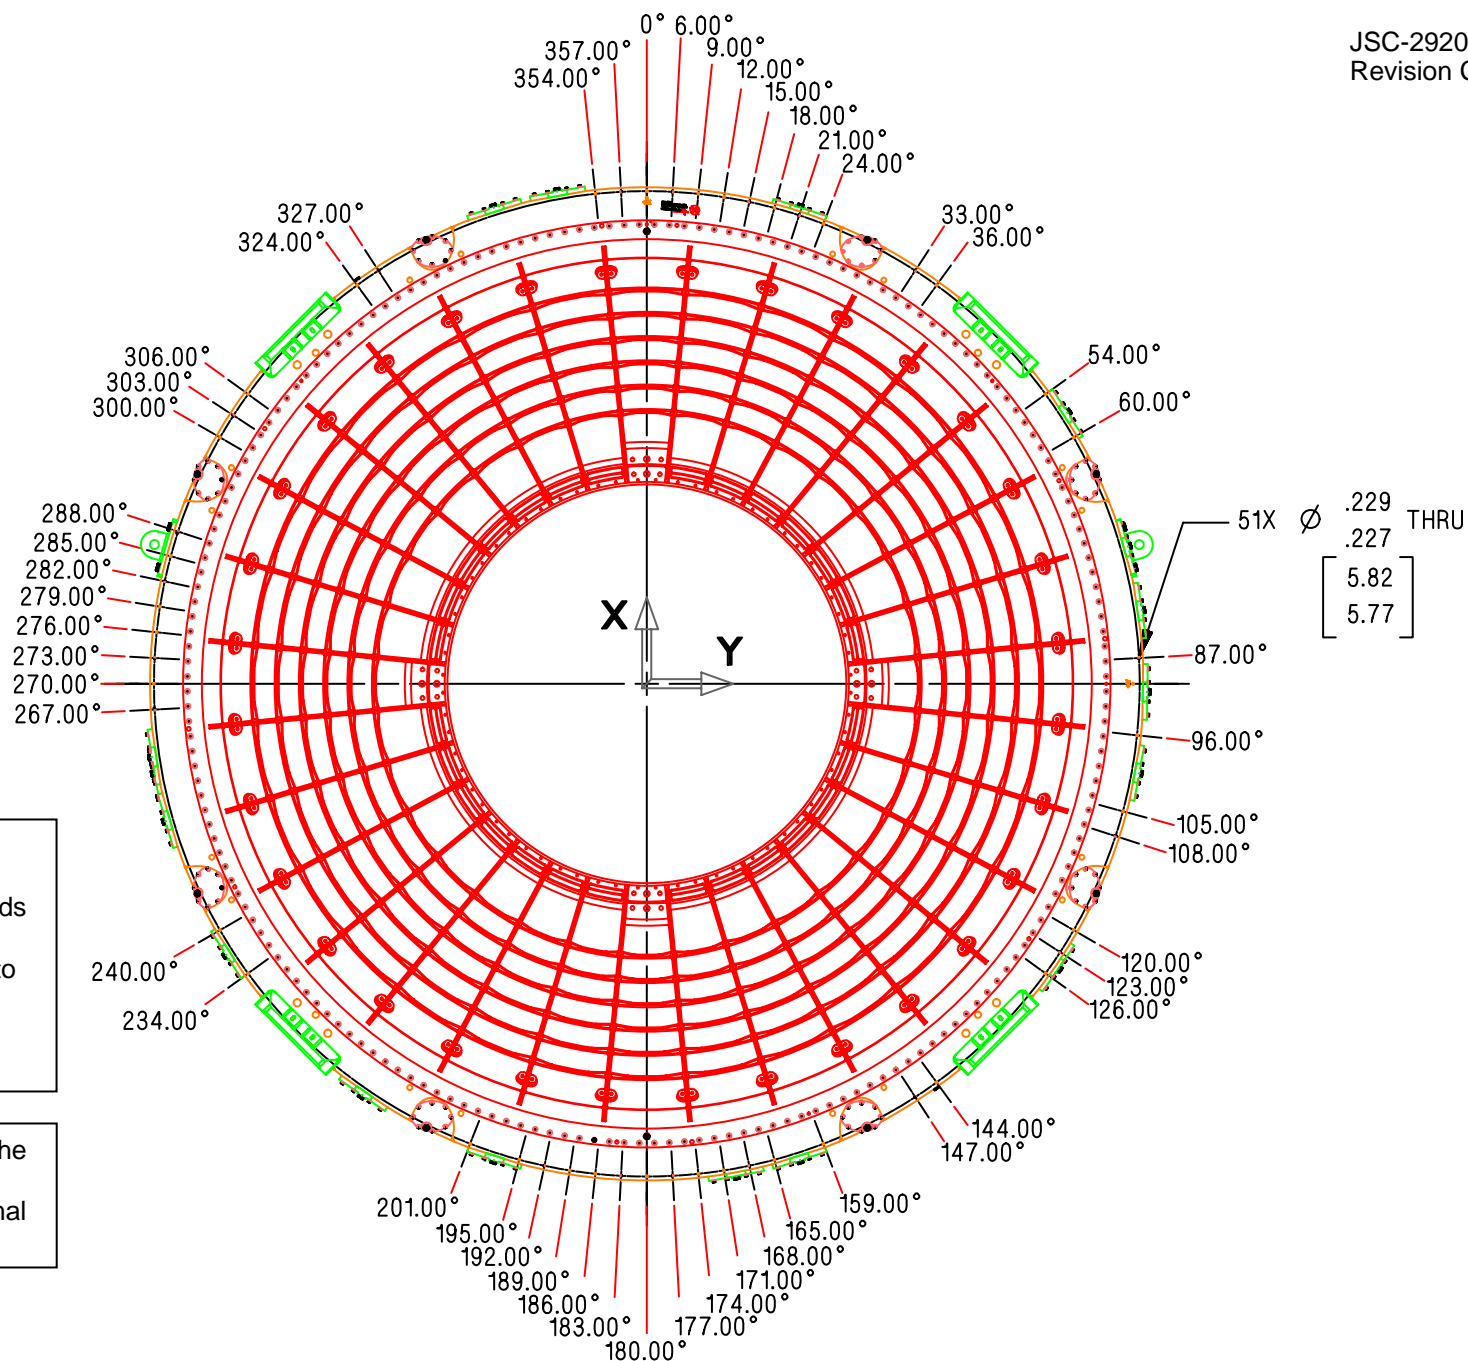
Generic Bolt Hole Pattern on VC Lower Support Ring
